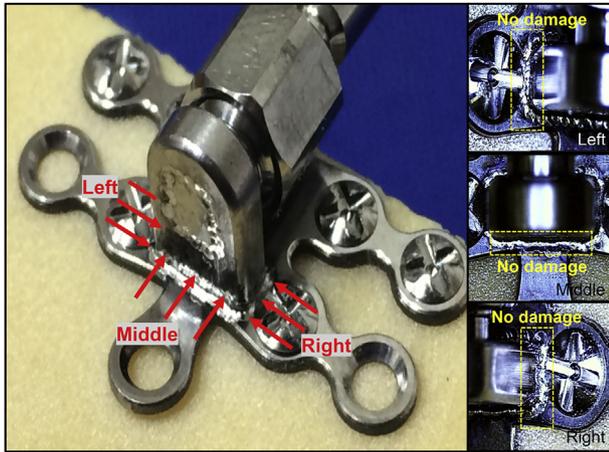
Welding edges between the base plate and ball-and-socket joint mechanism were found to have no damage, according to a non-contact video measurement system after welding strength testing.
